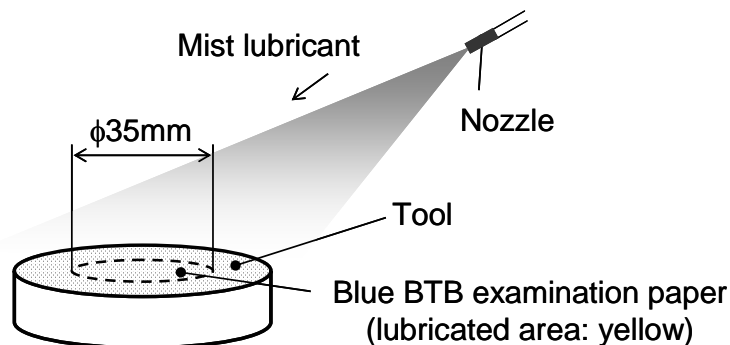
Measuring method for weight of sprayed lubricant and lubricated area on tool surface
